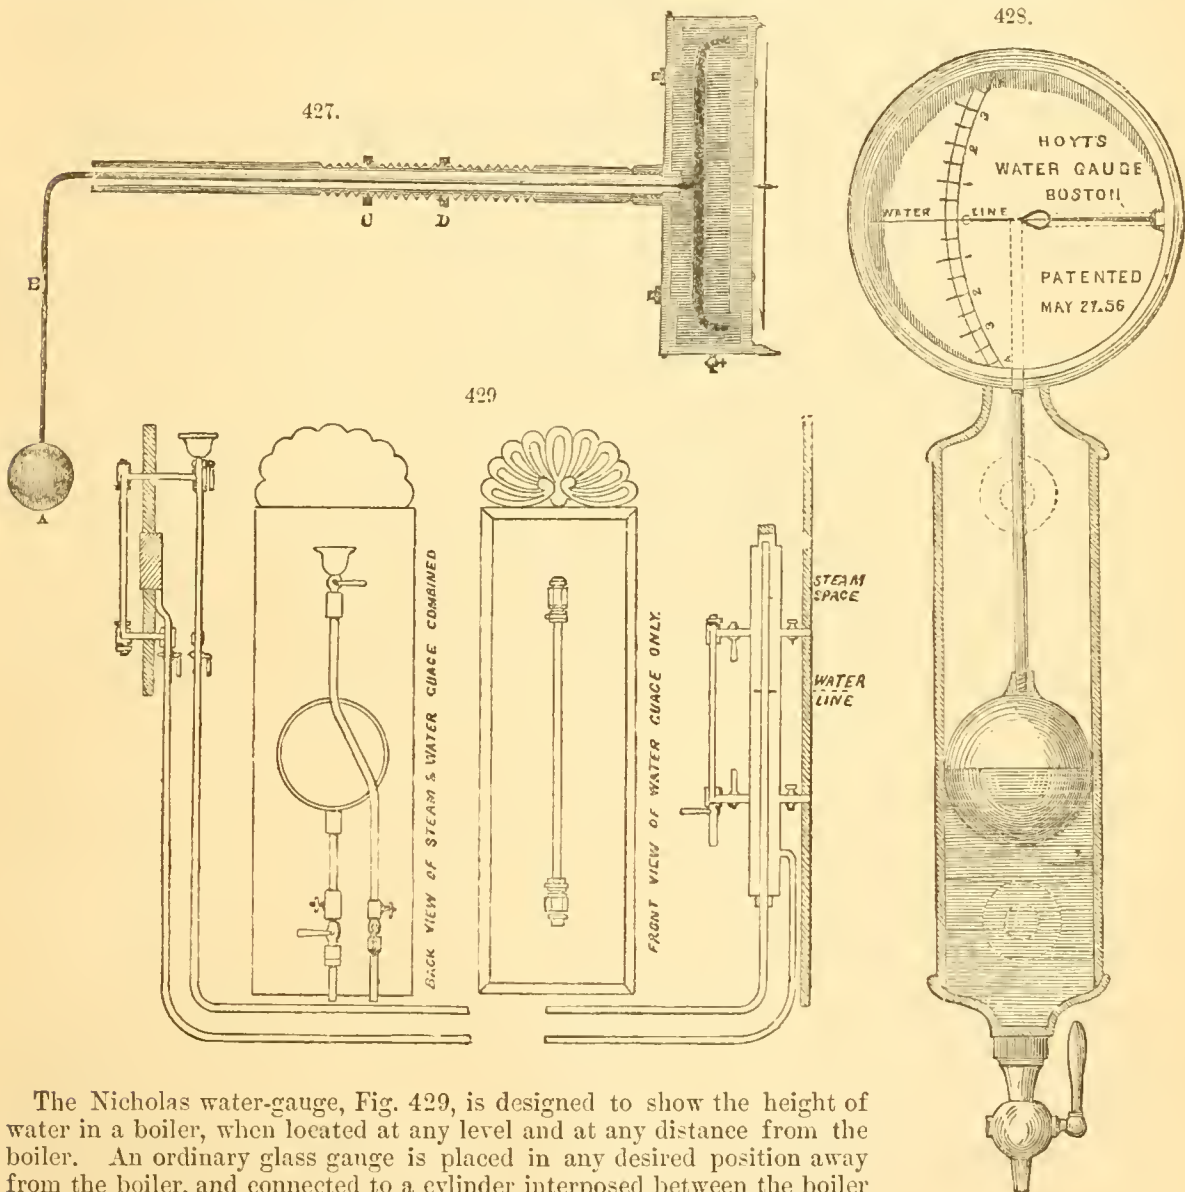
is a front view of the dial, showing the needle and graduation. Fig. 427 is a sectional view of the gauge.
